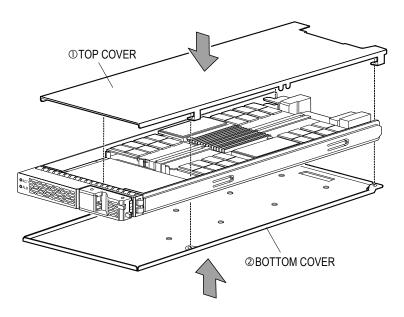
Reassemble the Flash Drive (FMD)
